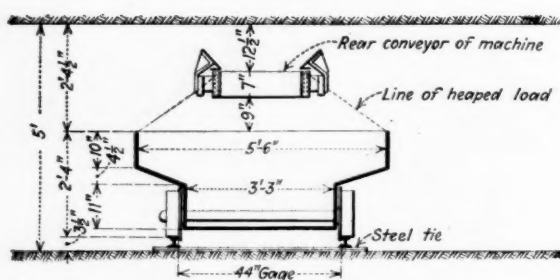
SUGGESTED SECTION FOR CAR TO BE USED FOR MACHINE LOADING A FIVE-FOOT SEAM
